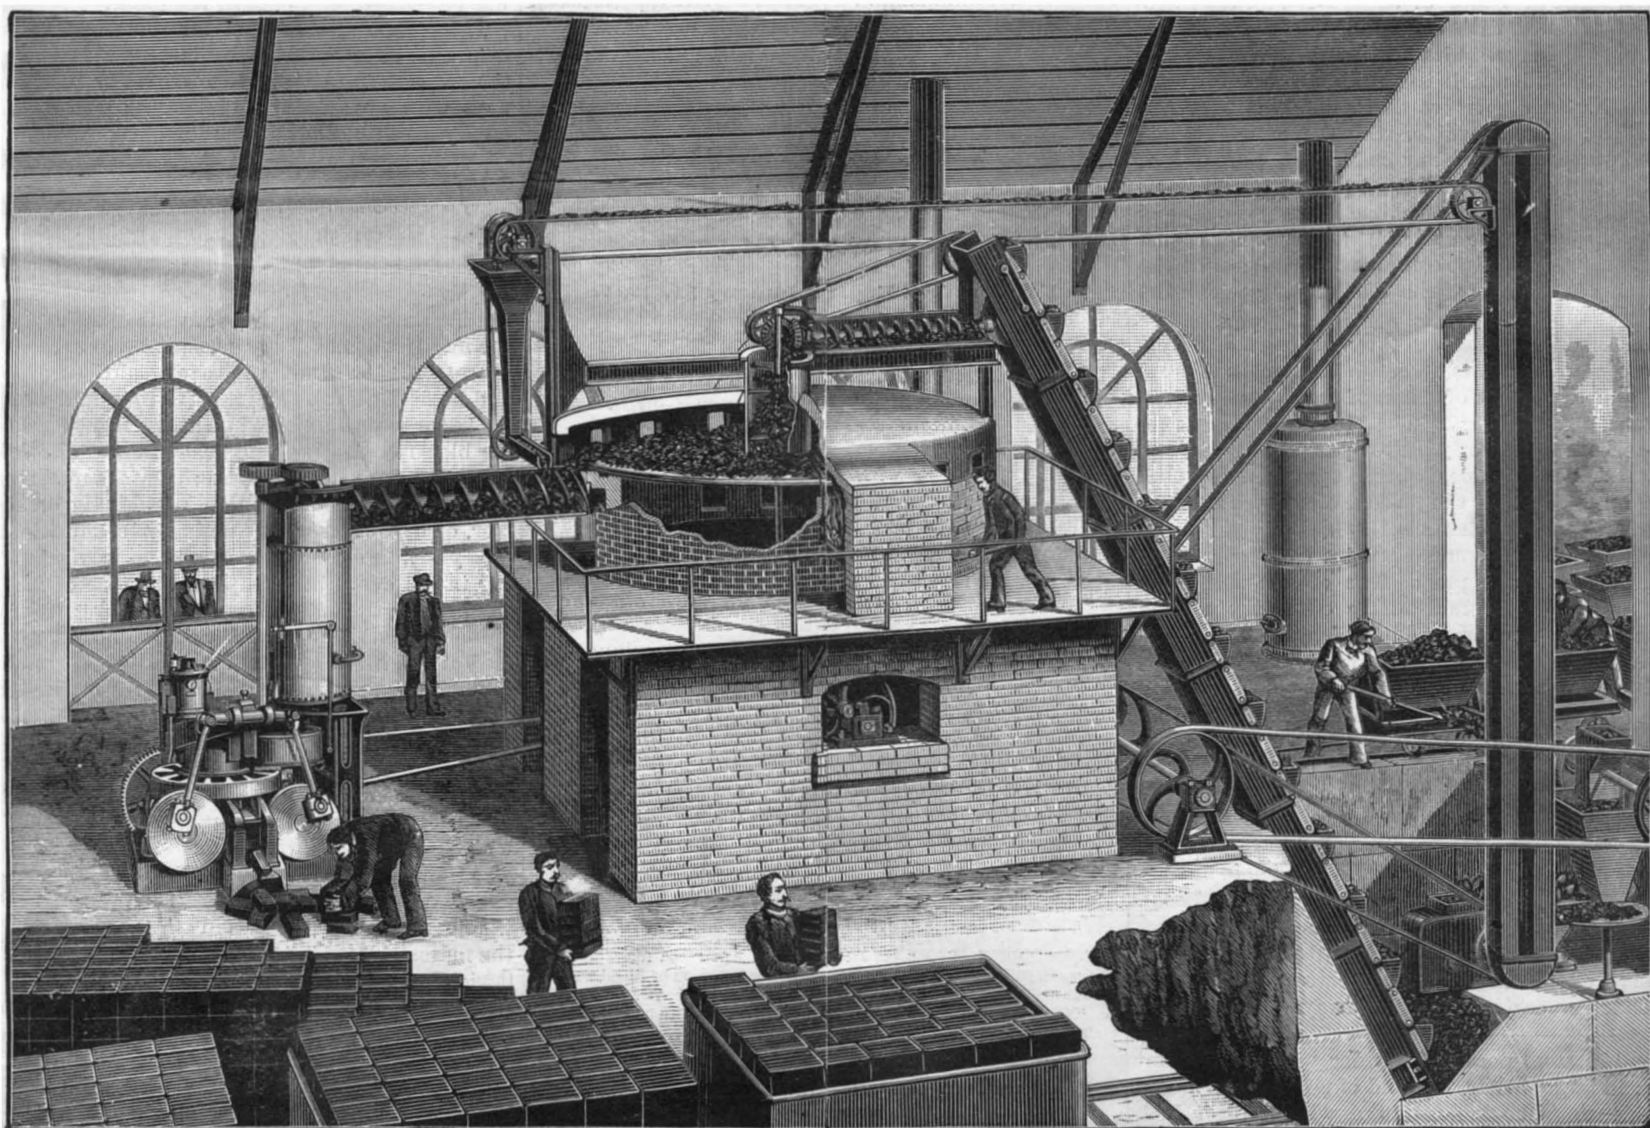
THE MANUFACTURE OF ARTIFICIAL FUEL.—DRYING, GRINDING, AND PRESSING.
